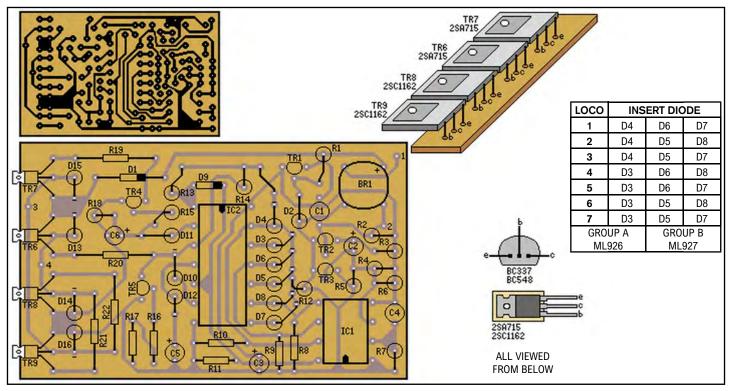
(a). Receiver board 2 track layout and component overlay. (b). Receiver board 2 transistor mounting.
